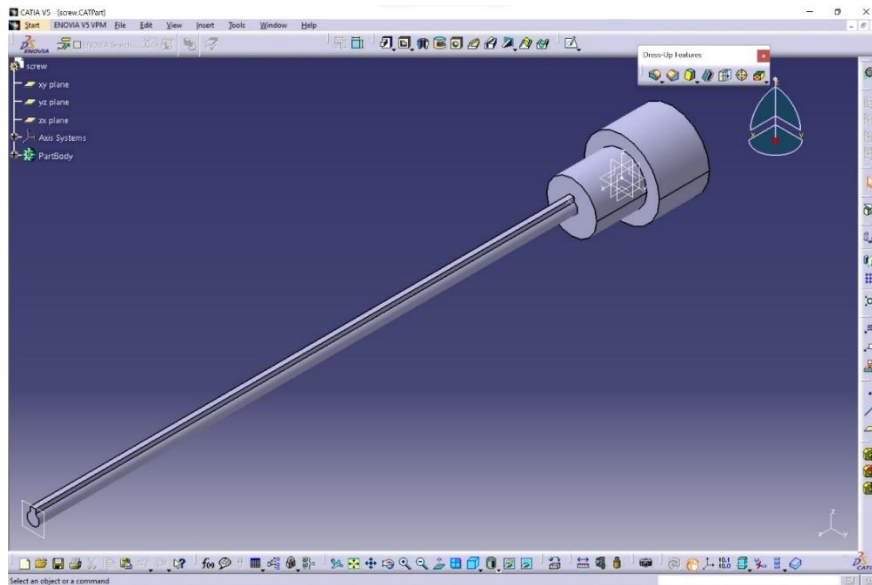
3D Model of Drill screw in CATIA
